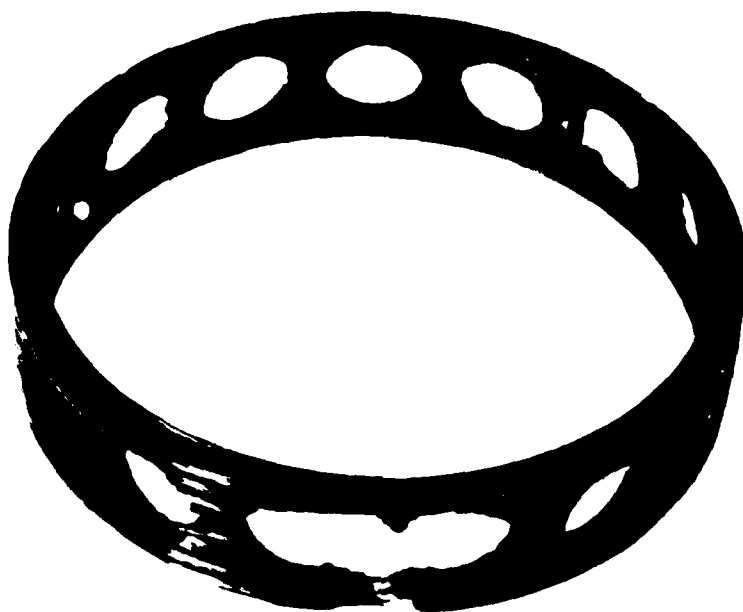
Self-Lubricating Composite Cage after Full Bearing Testing
